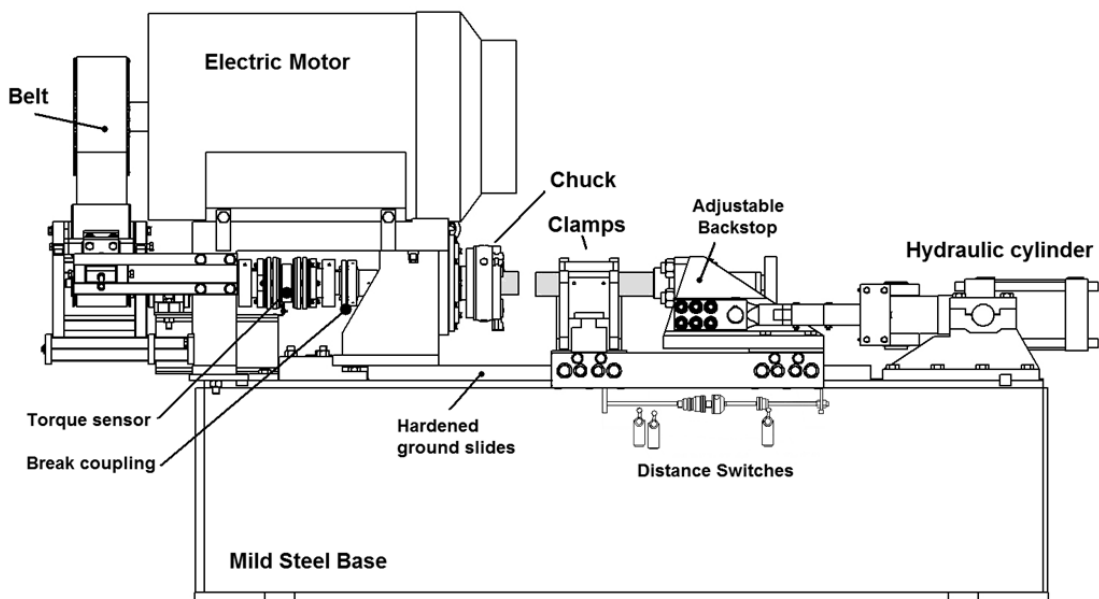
Overview of the basic components of the friction welding machine [12].
